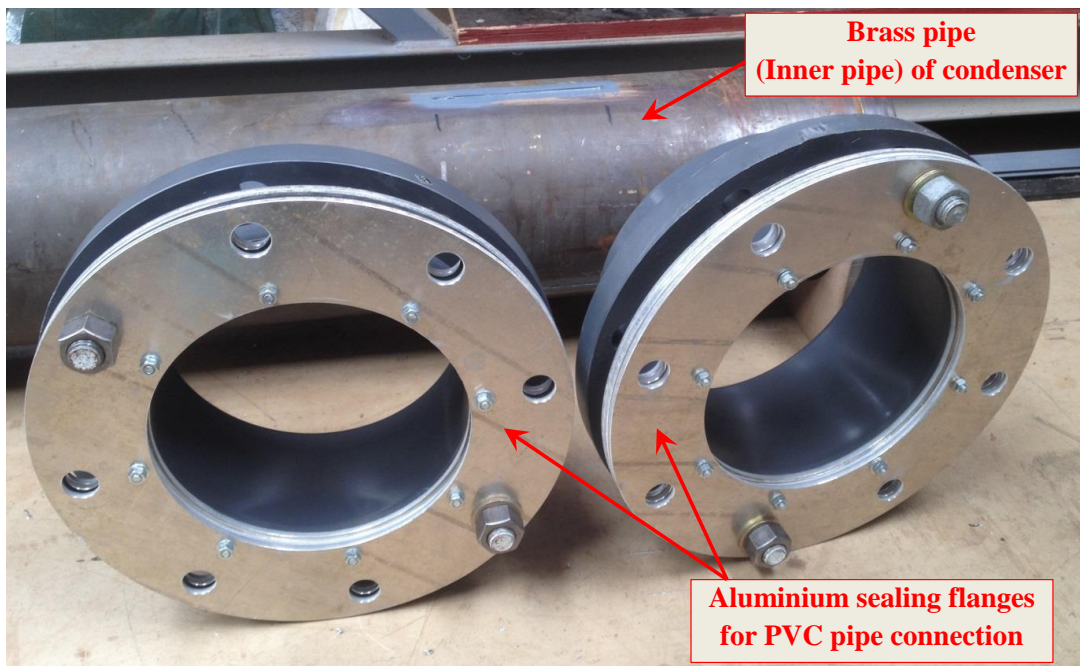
Aluminium sealing flanges to connect the PVC pipe and the brass pipe.
